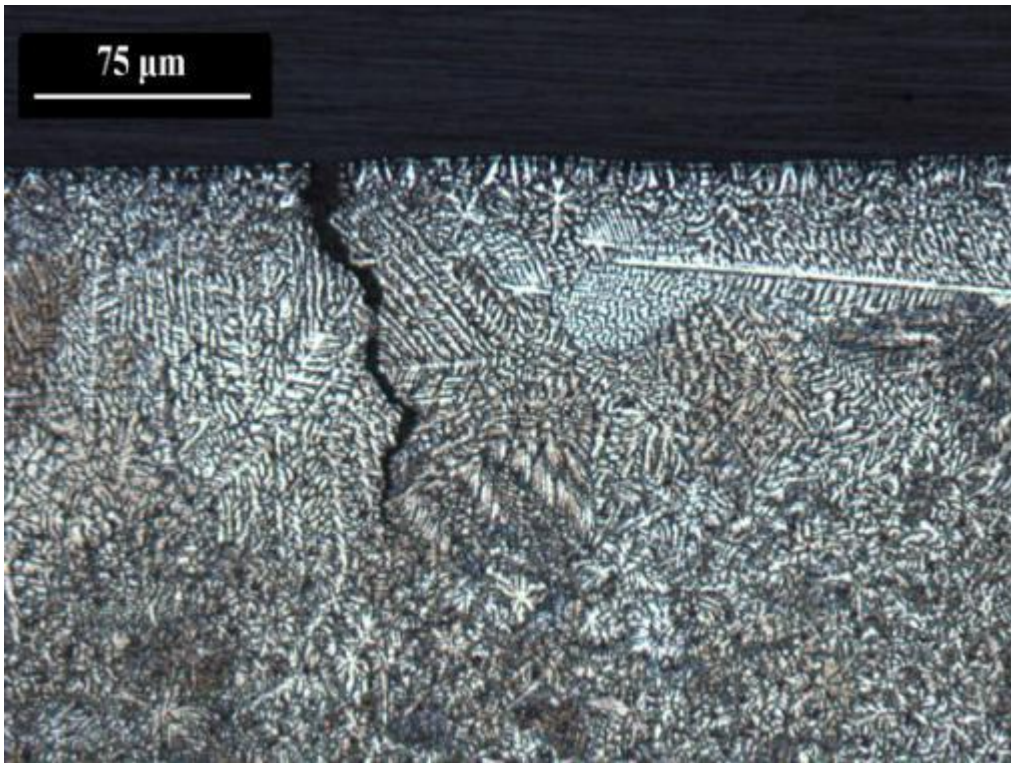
Solidification crack at a diode laser weld center line.
